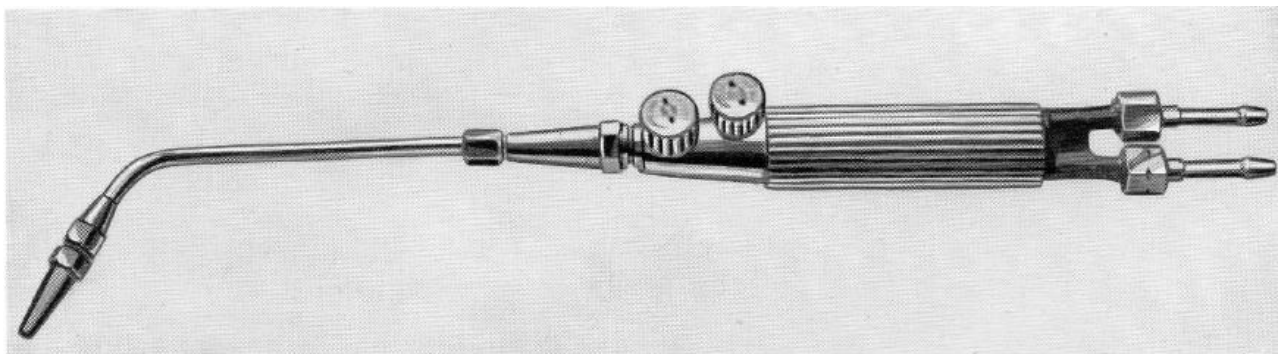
Type DH. H.P. blowpipe for welding metals from $\frac{1}{64}$ in. to $\frac{5}{16}$ in. Use $\frac{3}{16}$ in. bore rubber canvas hose Ref. H.P.1.
